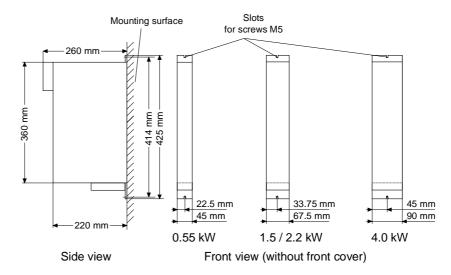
Dimension drawings for housings up to 90 mm wide
